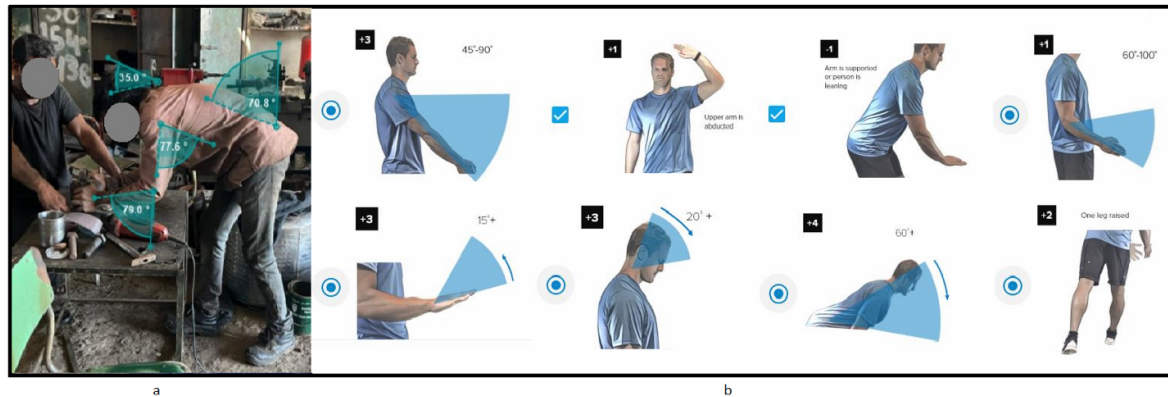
(a) An operator performing a sanding task (b) RULA assessment - sanding task
